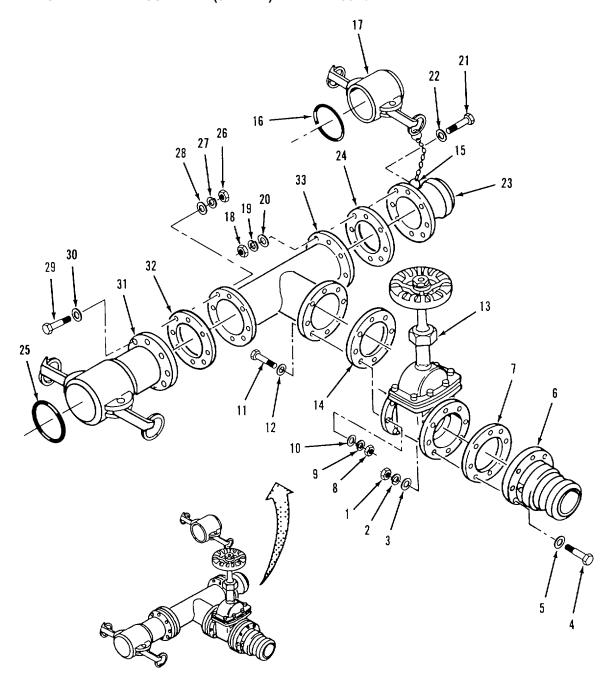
Tee and Gate Valve Assembly (9114-Y2) Assembly.
